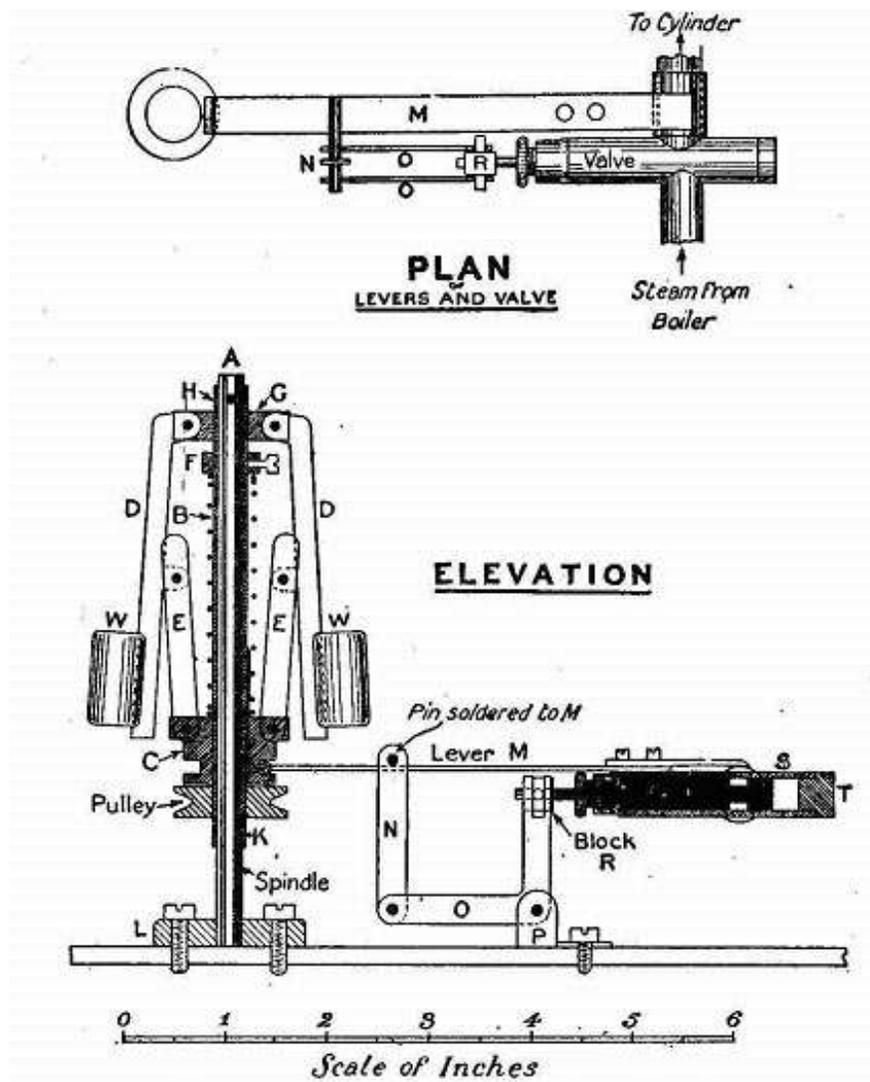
Elevation of governor for horizontal engine. Above is plan of valve and rod gear.
